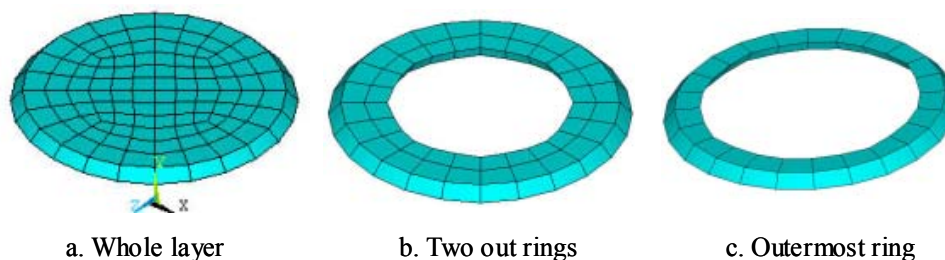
Different averaging volumes for PBGA solder joint.
